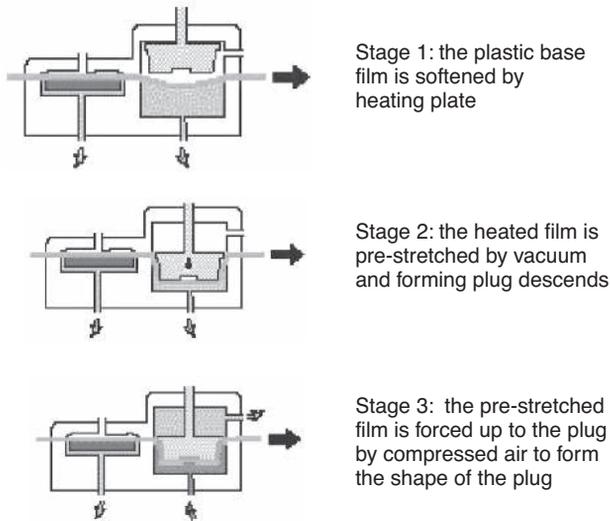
Thermoformed tray produced by plug assisted positive forming. (Courtesy of Multivac.)
